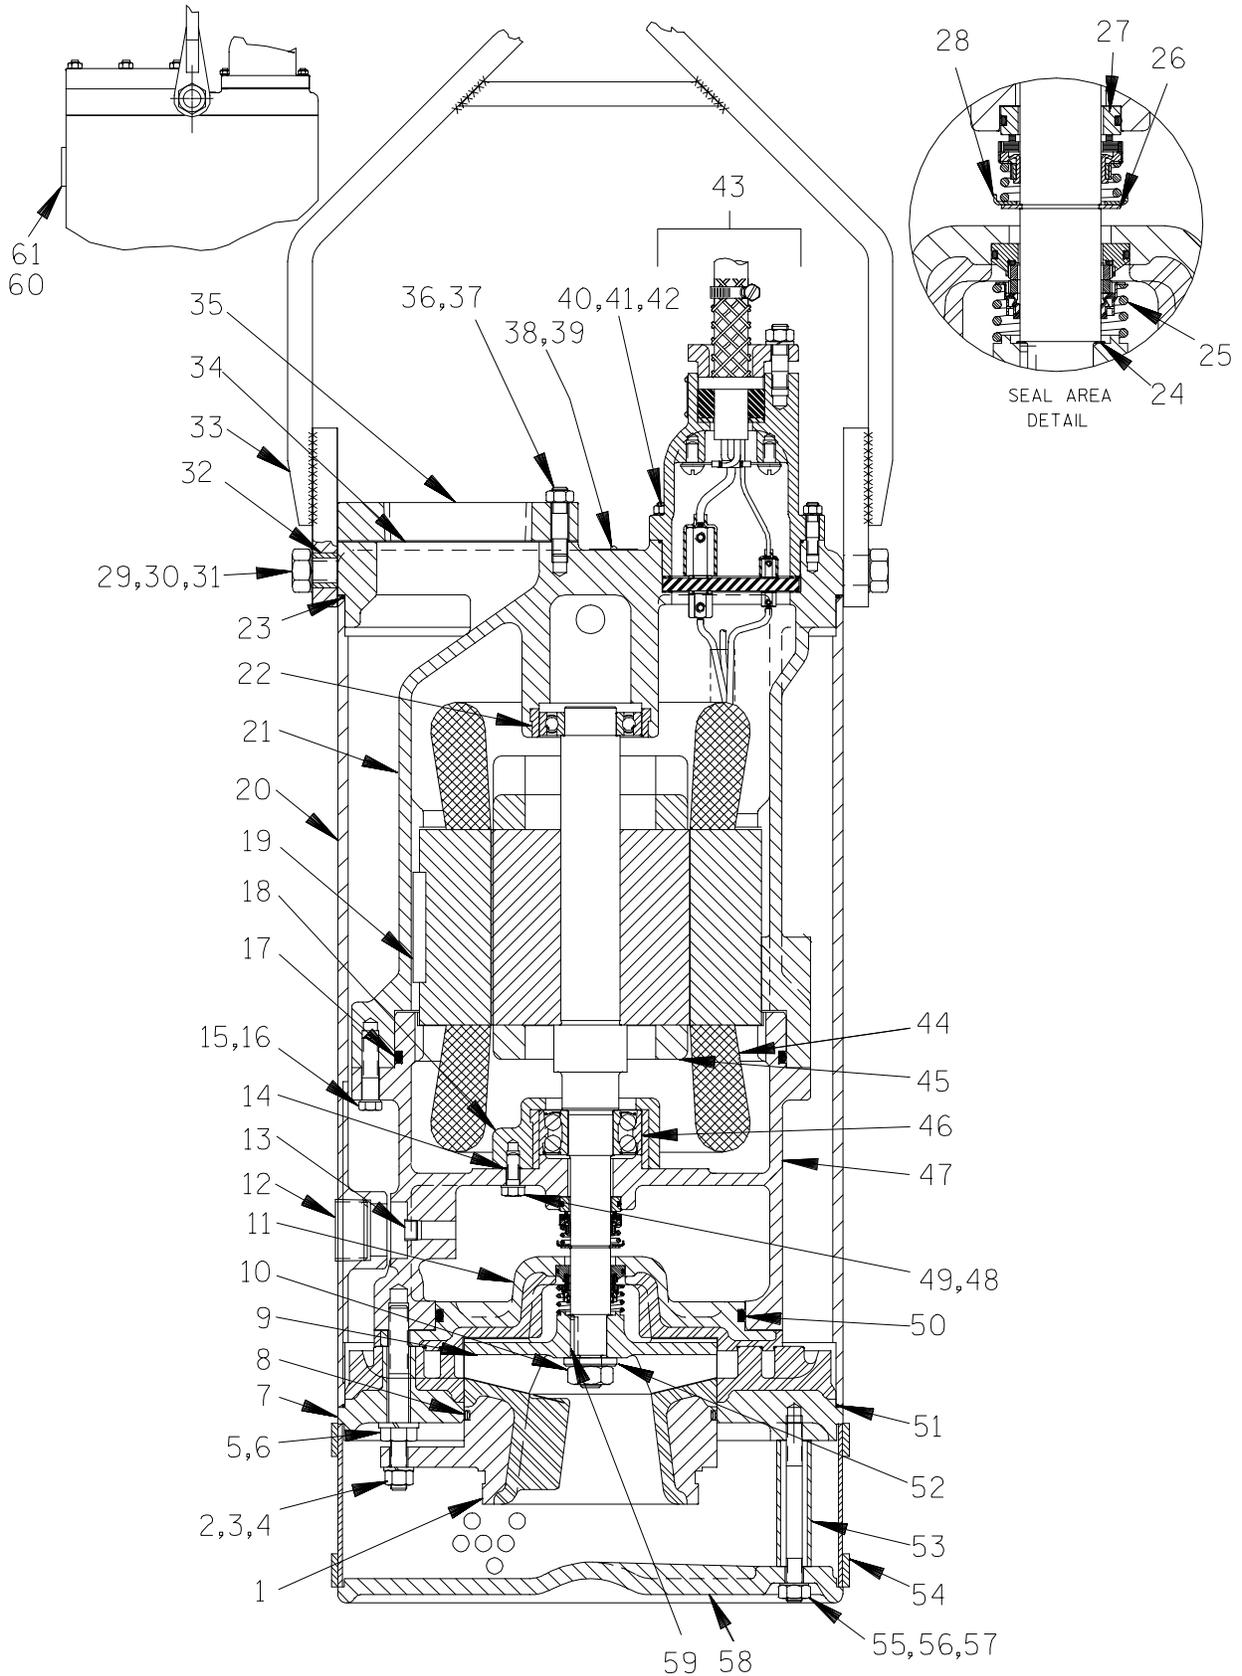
Typical SM4G And SM4J Series Pump Assembly
